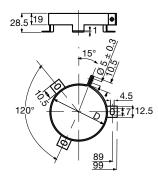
Dimensional outline of clamp for case Ø D = 76 mm
